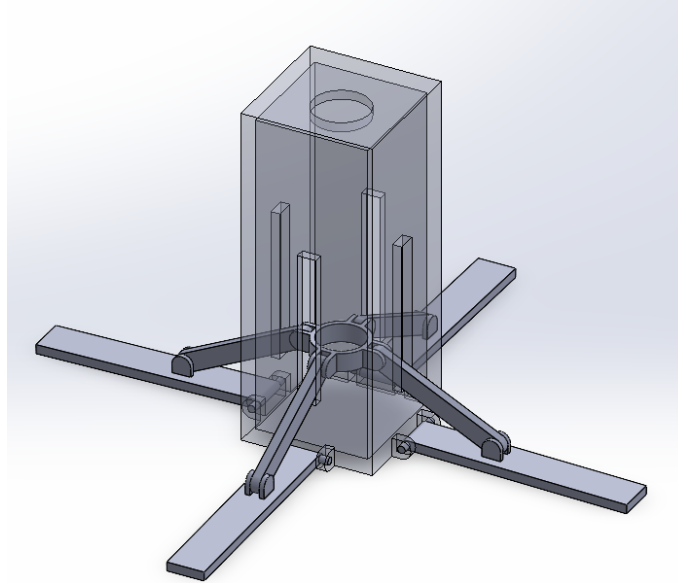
CAD Model of Deploying Driller in Upright Drilling Configuration
